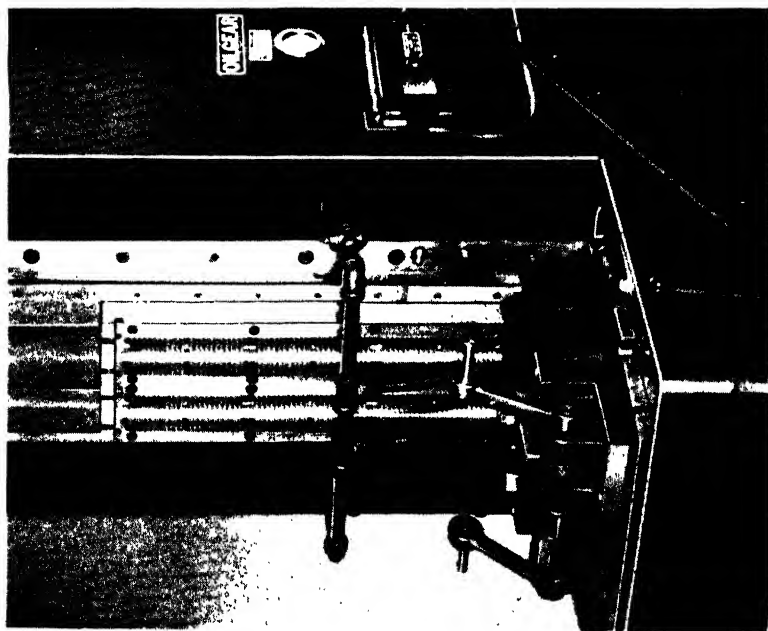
Broaching Machine Used for Finishing Connecting-rods and Caps
